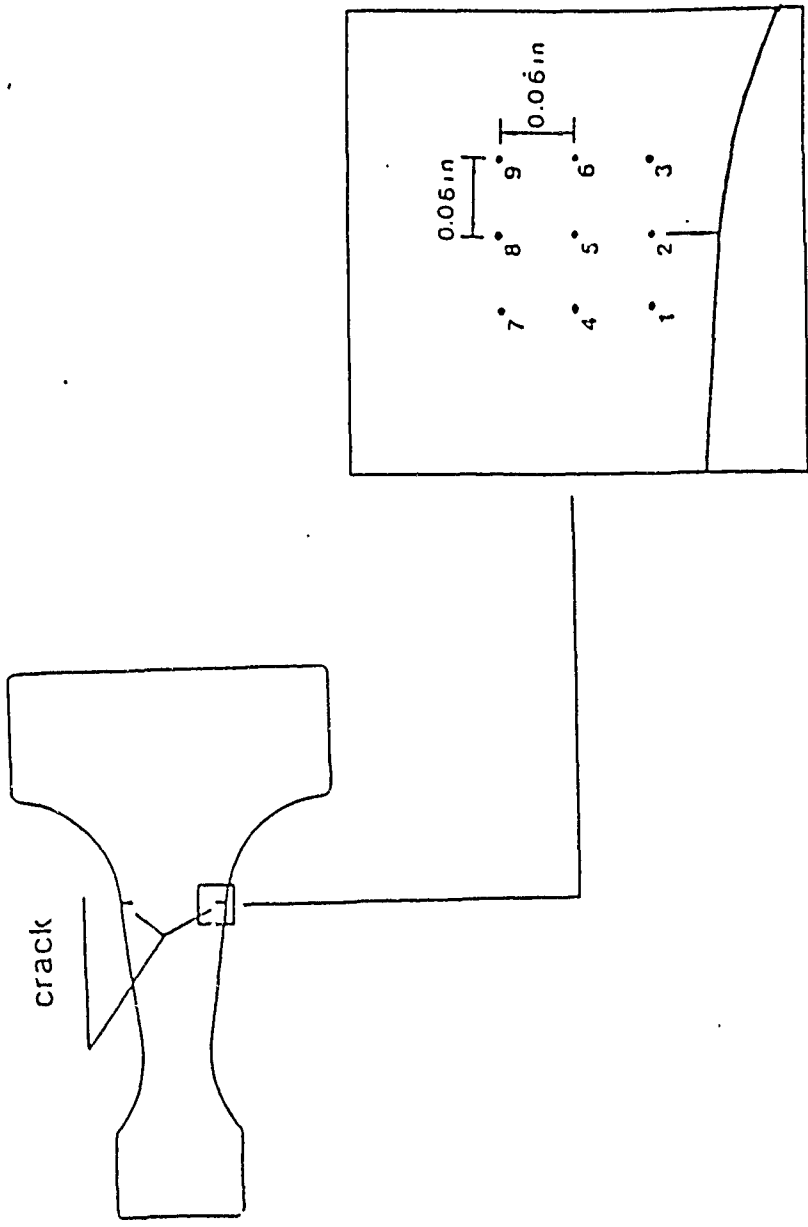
Fatigue specimen with cracks and the 9 test points are arranged around the tip of a crack.
